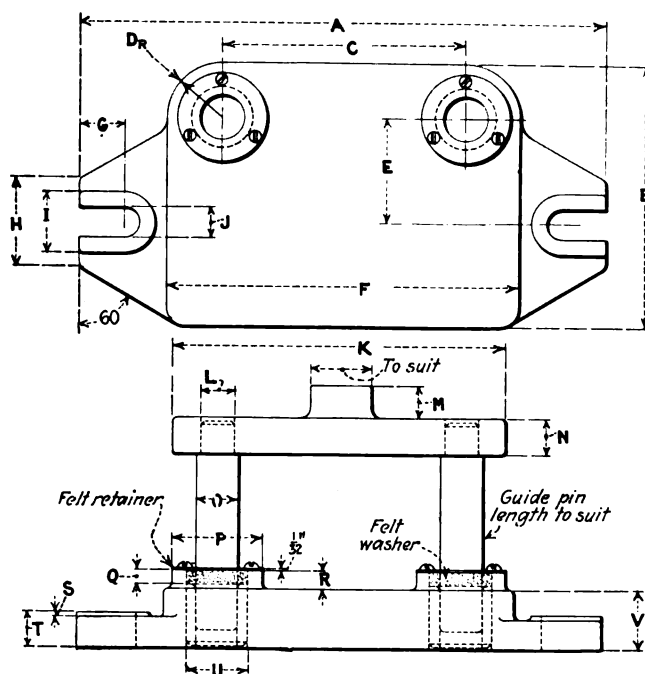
DIE FOR LARGE BLANKING, SHOWING GUIDE PINS AND STRIPPER DESIGNS
